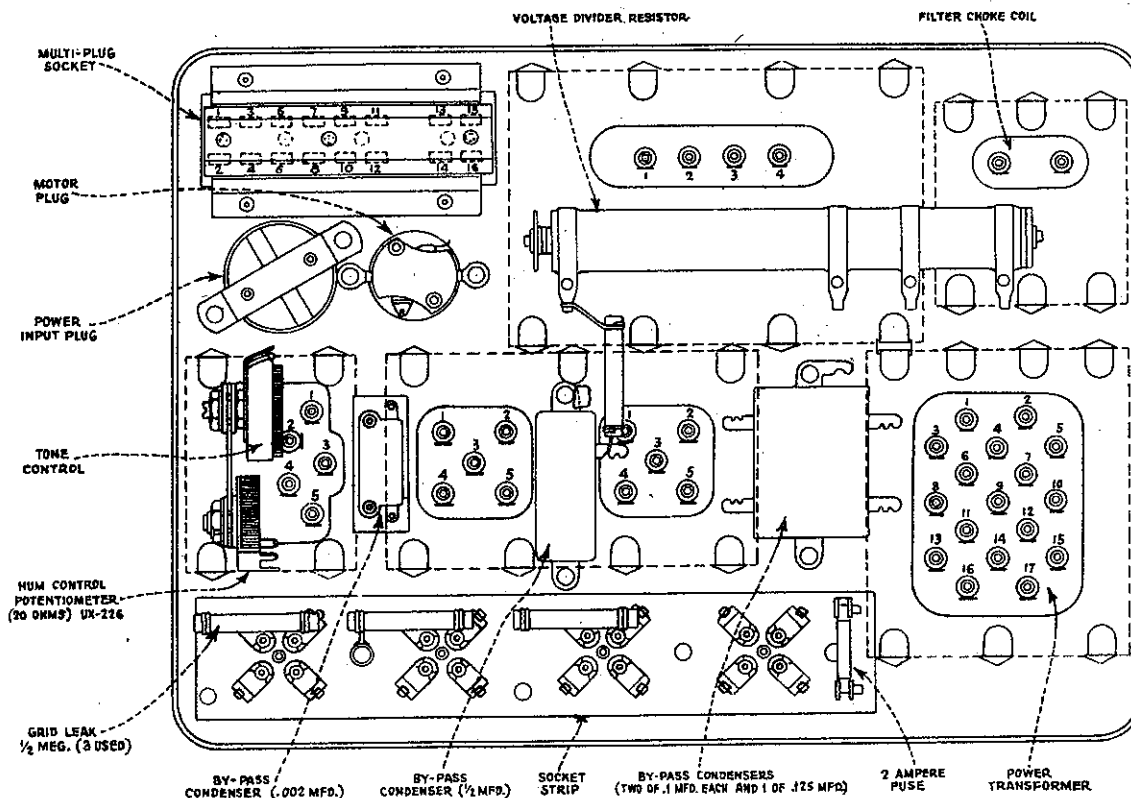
BOTTOM VIEW OF POWER AMPLIFIER UNIT, SHOWING PARTS.
